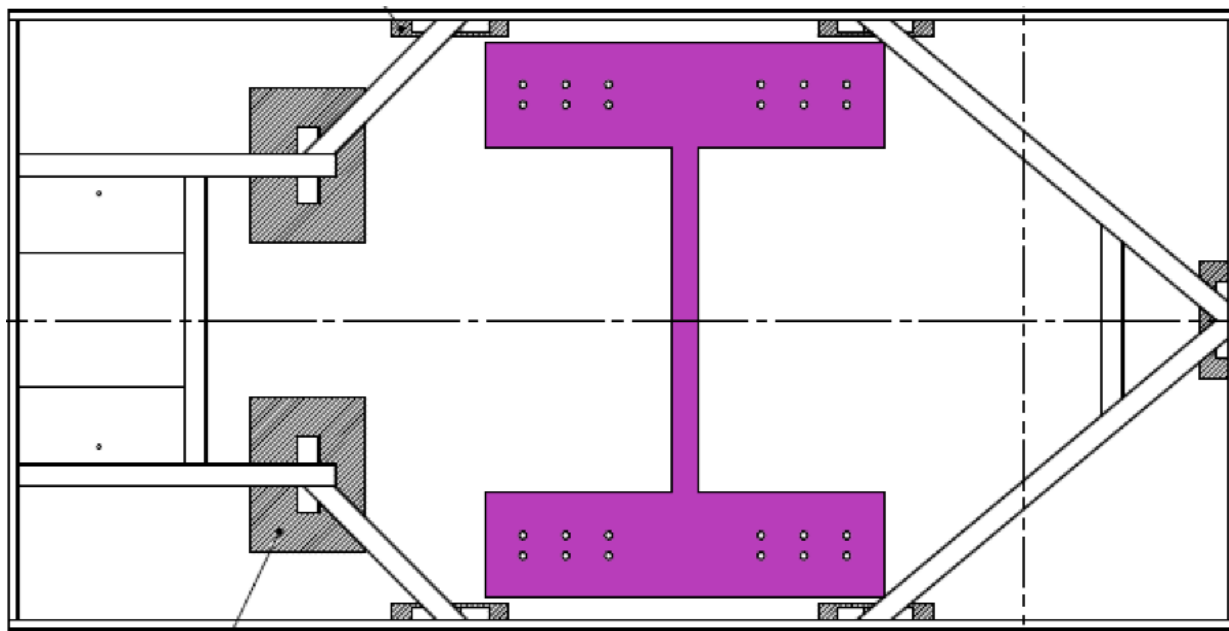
H-Plate design (refer to E0040-00168 for mechanical drawing)
